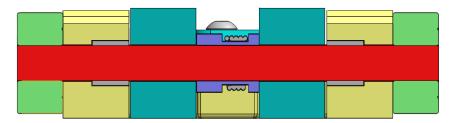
Cross-Section View of Center Shaft, Segments, Bushings, and Spring
